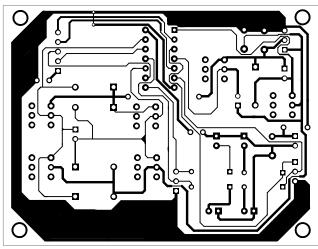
Actual-size PCB layout of the sensing peripheral devices circuit
